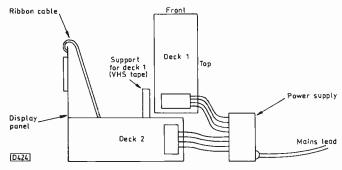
Way of arranging the Amstrad 8900's two decks to enable checks to be carried out on the lower one.
